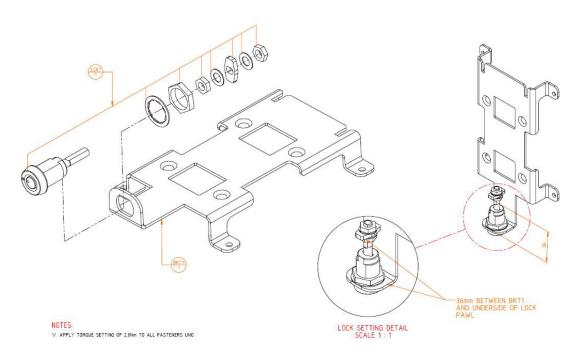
PROD0059 Cradle Assembly (45-0710) Page 1
